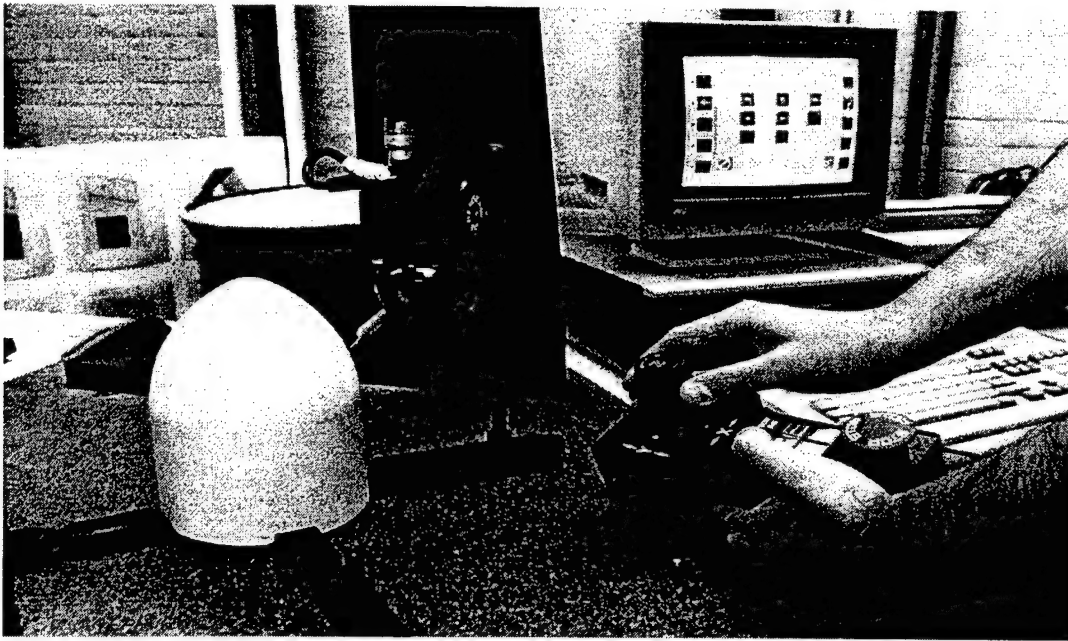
Brown & Sharp Coordinate Measuring Machine
